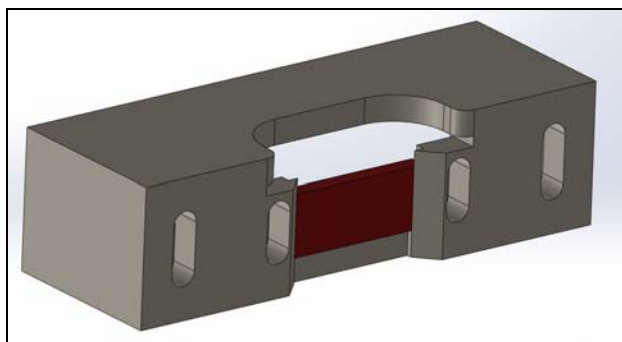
Test sample mounting with the sample (red) – 3D CAD model
